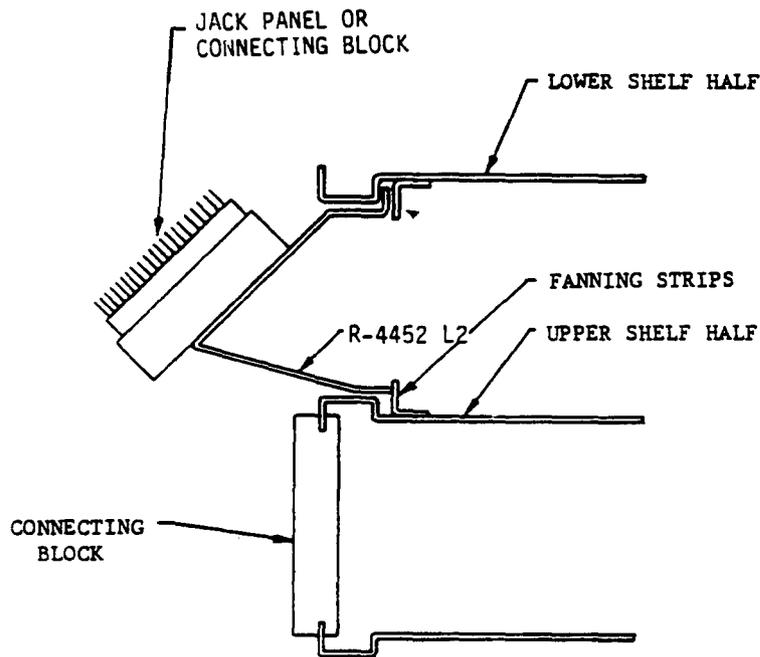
TEMPORARY MOUNTING OF TEST-TALK PANELS
